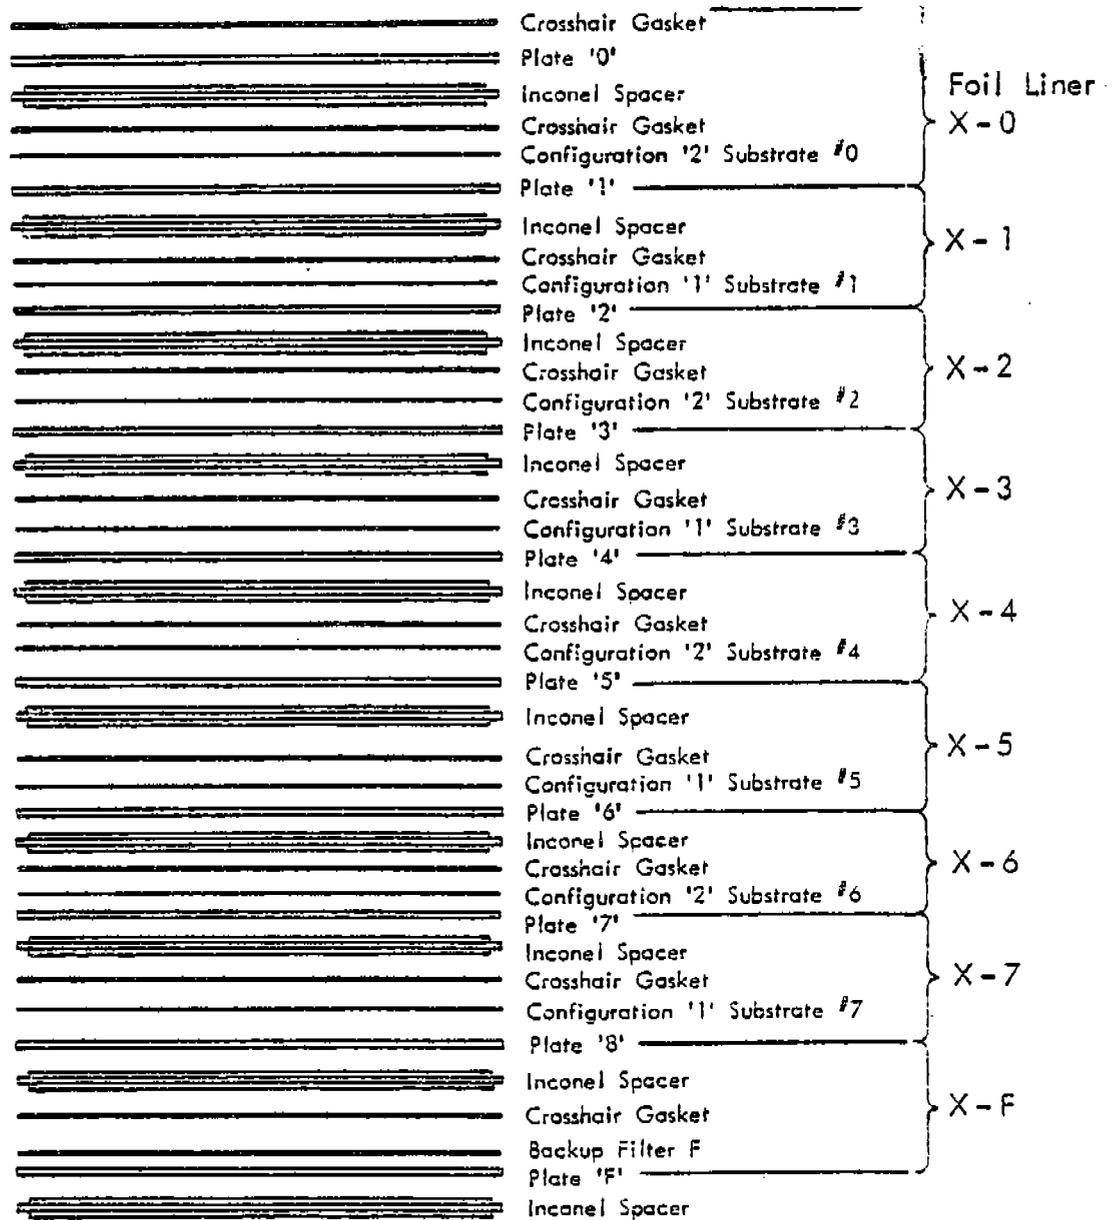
Exploded view of an Andersen Mark III impactor.
